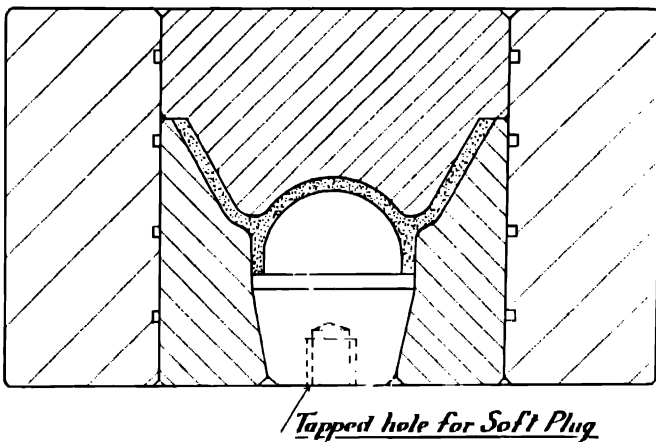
Positive mould, showing grooves to reduce scoring troubles.
